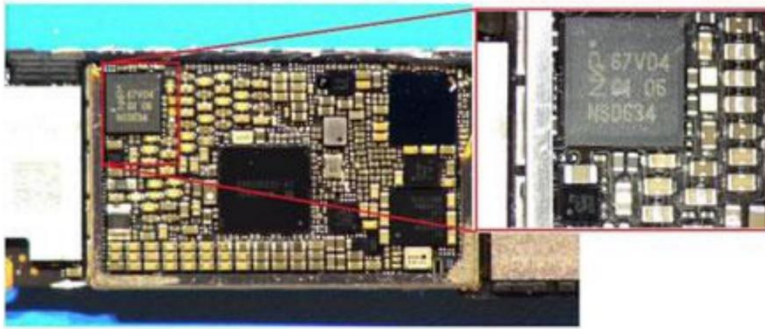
iPhone 7 PCB showing numerous MLCCs and a higher magnification of a typical Class I MLCC (right inset). Note these are surface-mounted parts and, due to their very small dimensions, have no manufacturers markings ruling out inspection as an easy means to determine MLCC authenticity.
